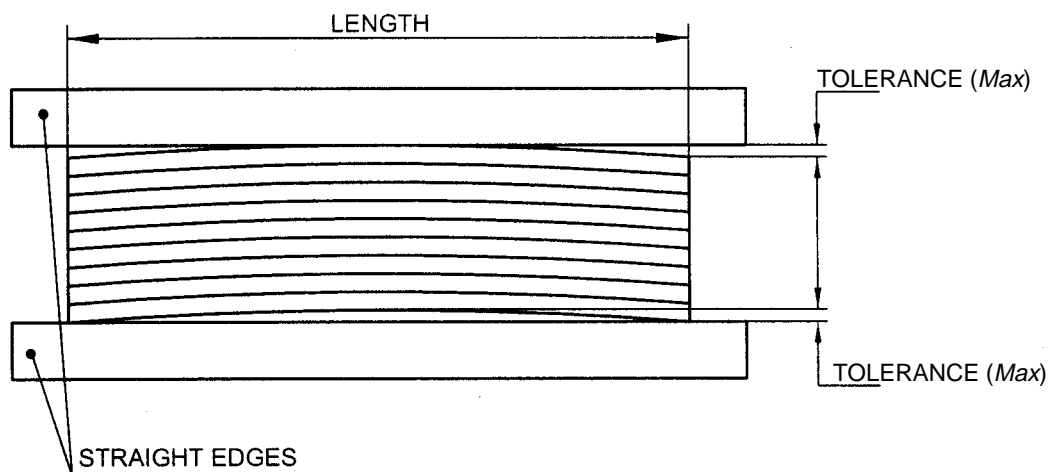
TEST FOR WINDING OR BOWING IN THE LENGTH DIMENSION
